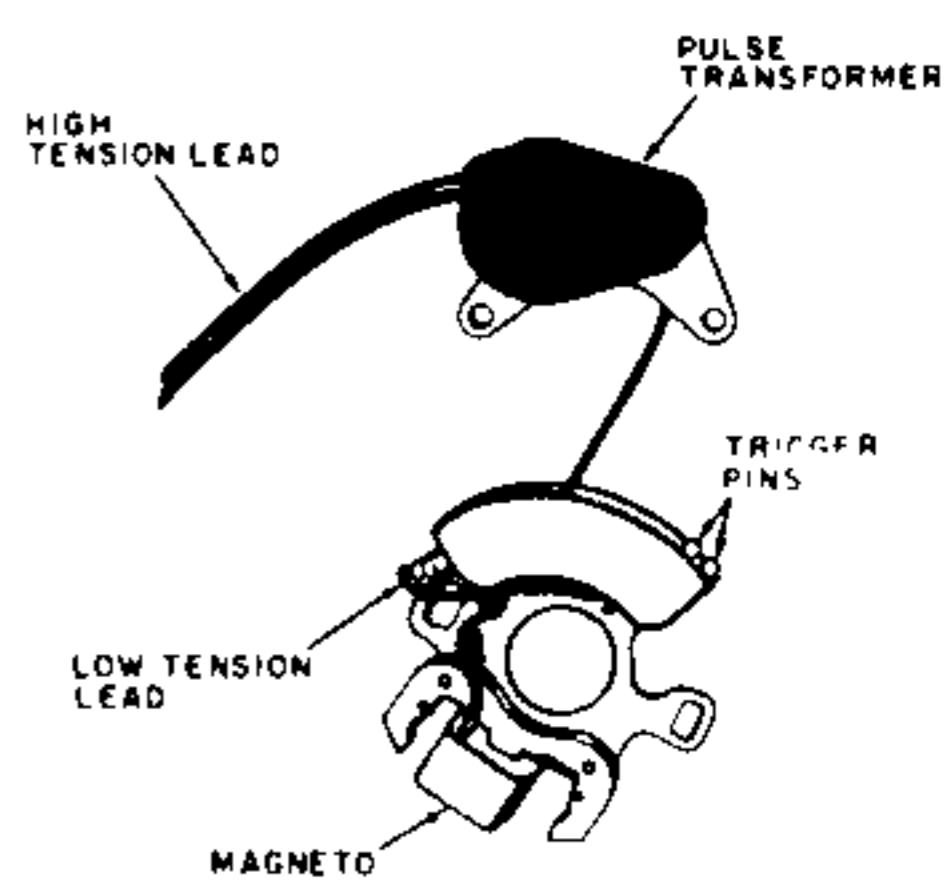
View of solid state ignition system used on some models not equipped with flywheel alternator.
